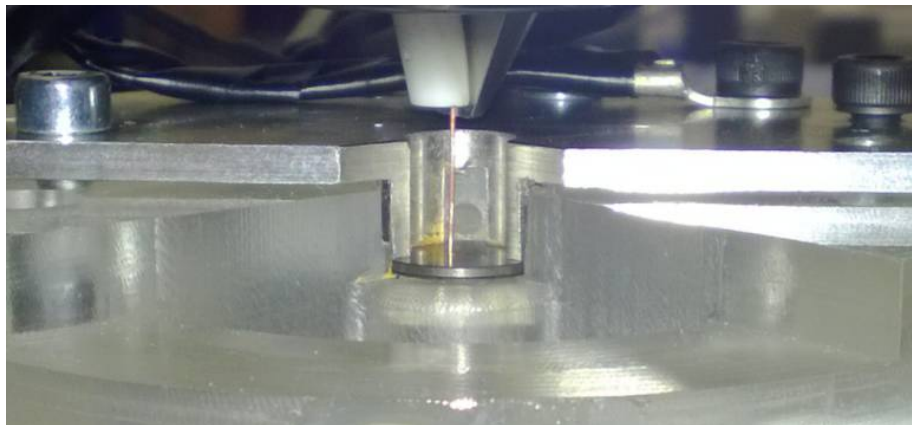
Picture of the workpiece (coin) being clamped by the cap and making electrical contact with a copper electrode.
